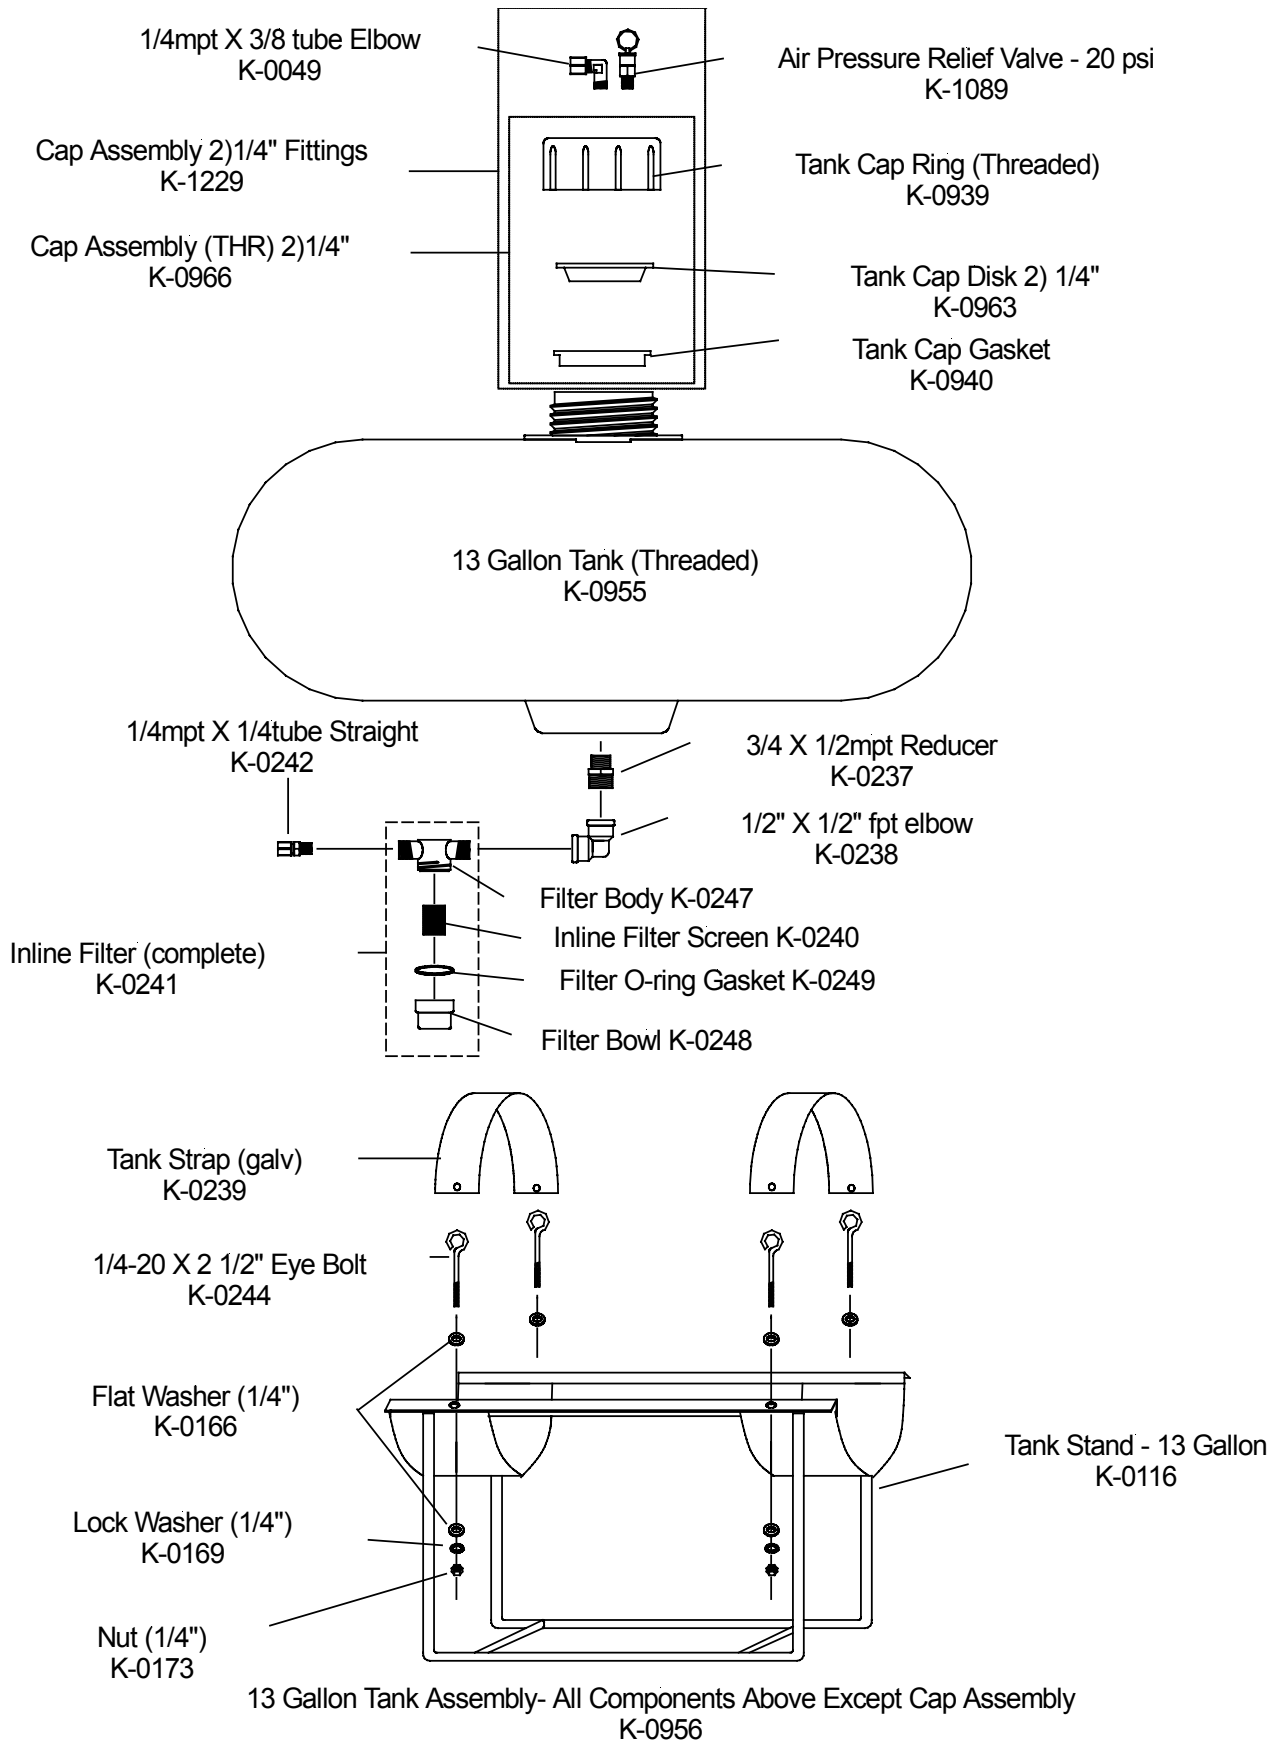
Trac Master 13 Gallon Tank Assembly
